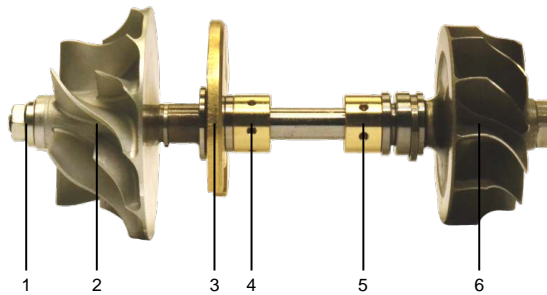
A turbocharger rotor with (1) a nut, (2) a compressor wheel, (3) a thrust bearing, (4) and (5) floating ring bearings and (6) a turbine wheel.
